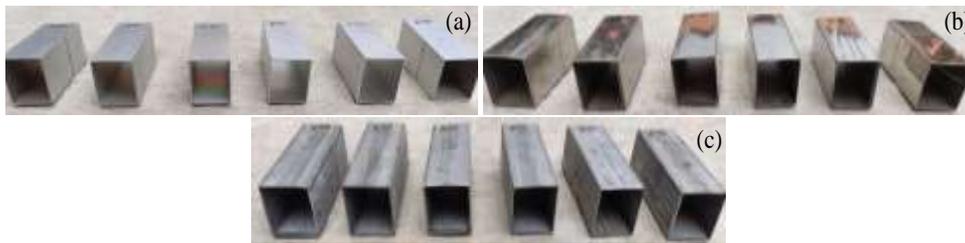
(a) Aluminium, (b) Stainless steel, and (c) Mild steel specimen for ETF test specimens
